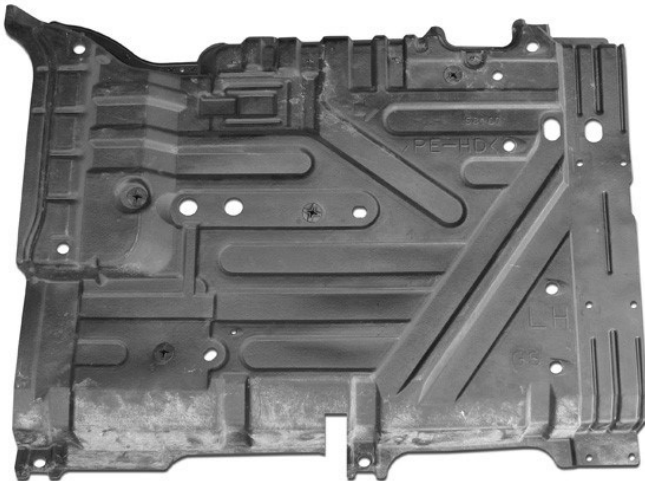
B) Cut Cover Only Enough To Clear Bracket. Cut Shown For Example Only
